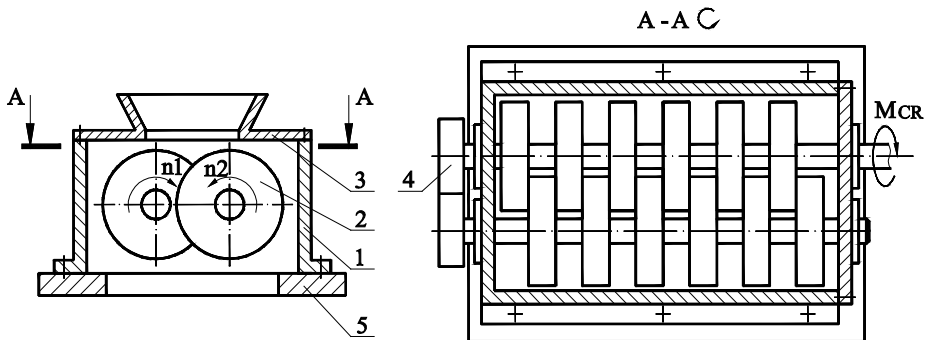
Disk chopper: 1 – racks; 2 – discs; 3 – cover with hopper for loading; 4 – gear transmission; 5 – a bed [23]
